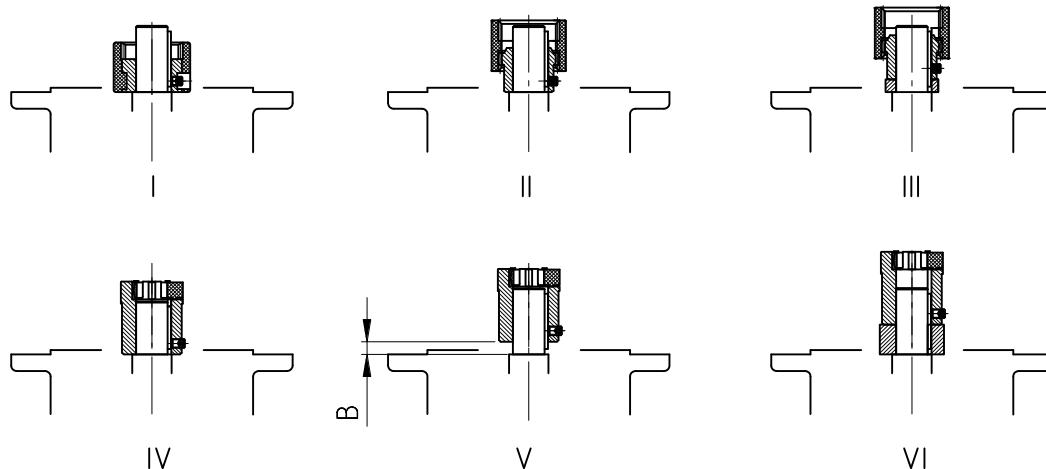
Fitting the coupling onto the motor shaft - various types of coupling
